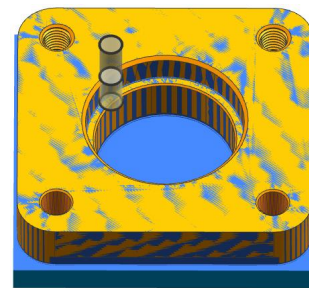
3D dynamic simulation results of machining the reverse side features of the bearing pedestal
